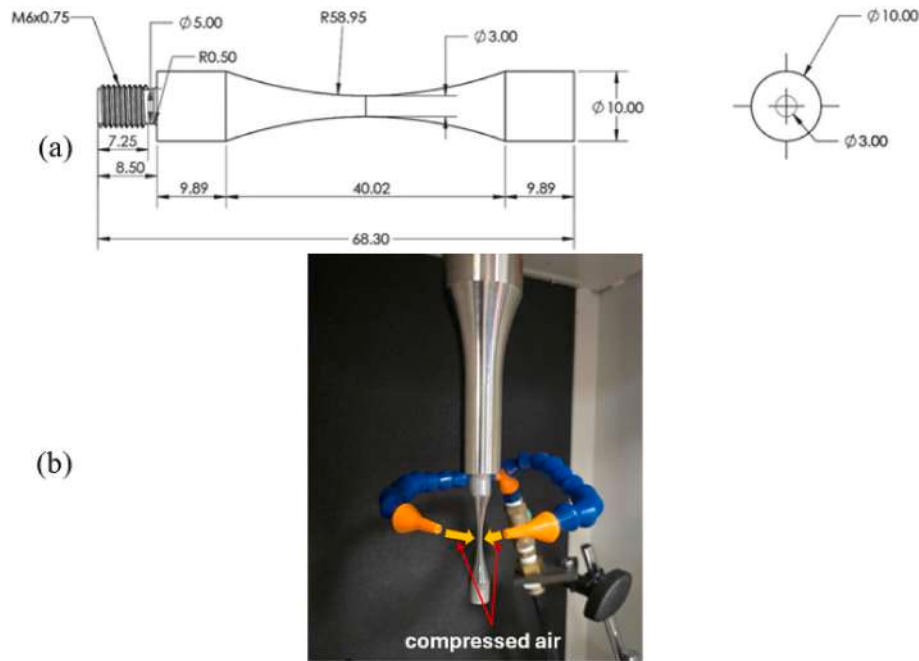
(a) Hourglass specimen geometry and dimensions for USF testing of PBF-LB AlSi7Mg. All dimensions are in mm, (b) USF testing setup.
